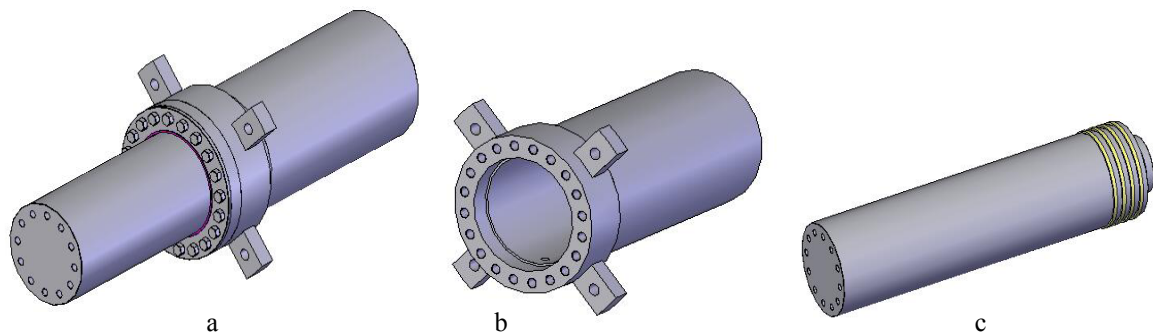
3D representation of: a) the assembly of linear hydraulic motor; b) hydraulic cylinder; c) plunger.
